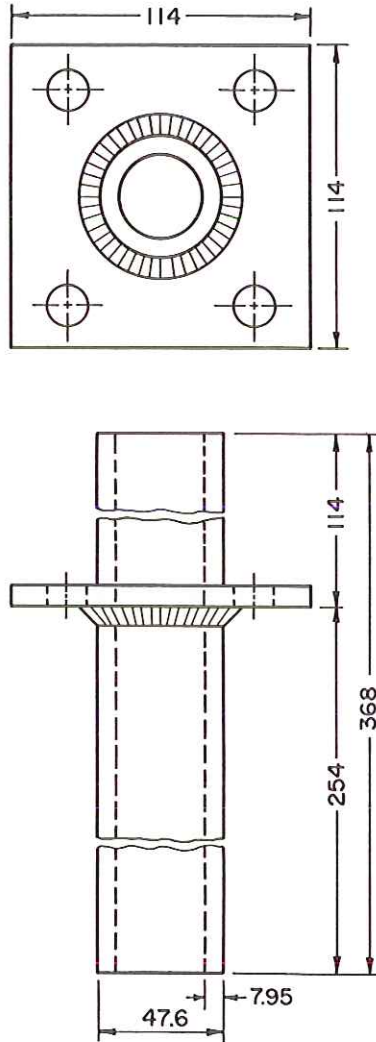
Specimen geometry of the tube-to-plate welds (units in mm). Fatigue cracks initiated at the weld toe formed by the tube outer surface and the weld metal
